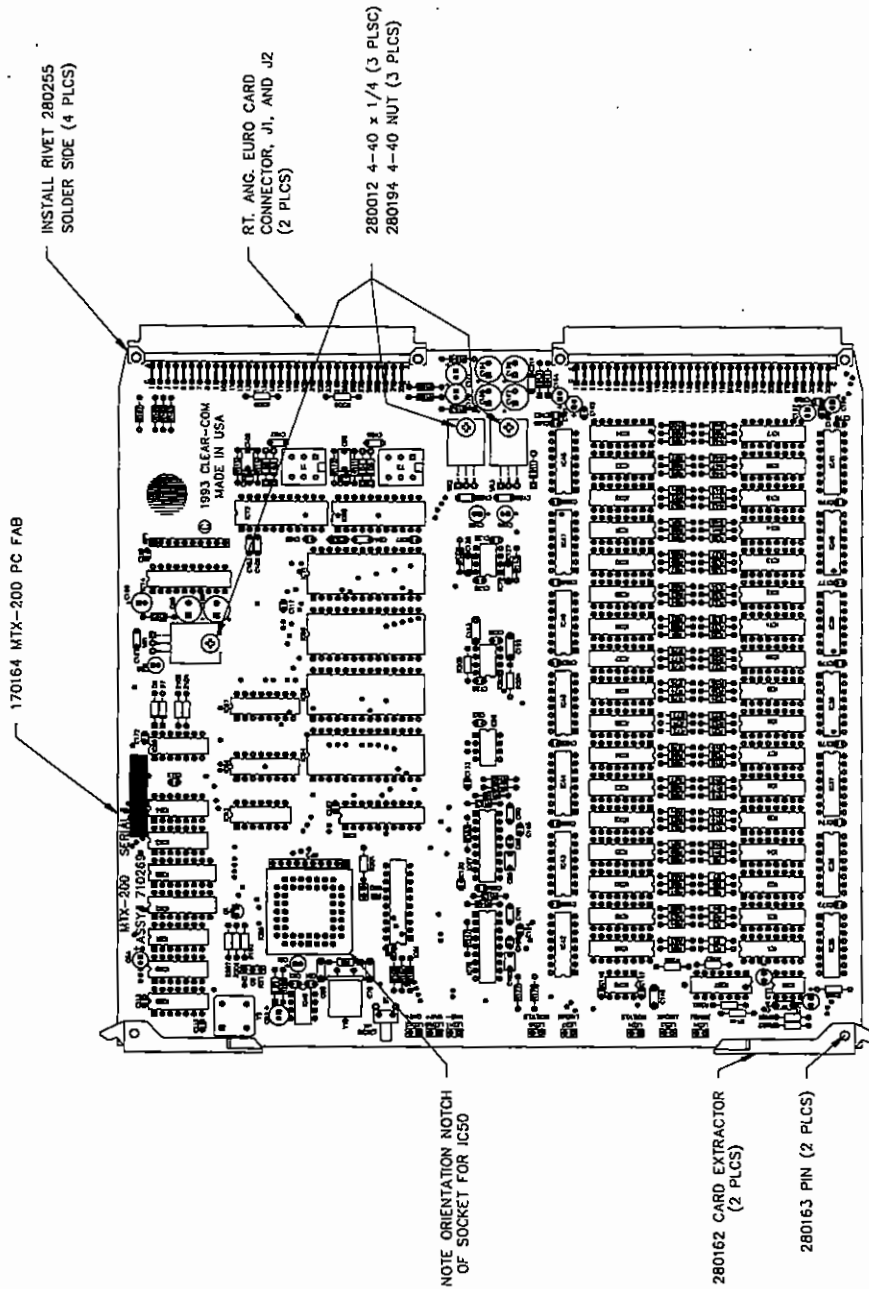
Assembly Drawing - MTX-200 PCB, Rev. A
